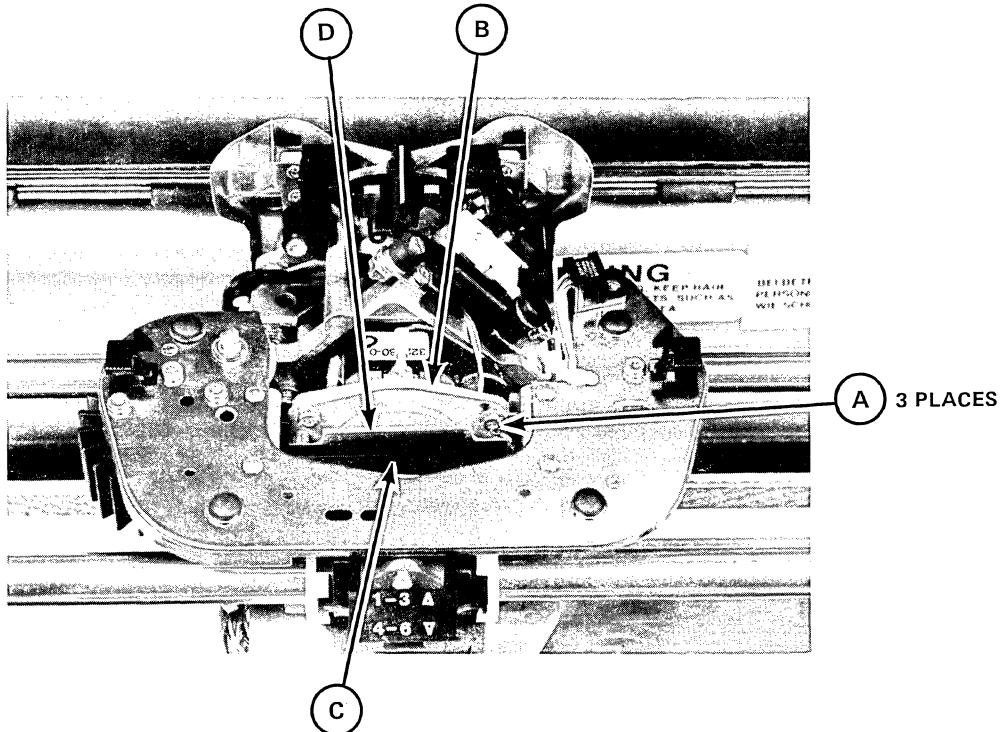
ADJUSTING THE ECS PRINT WHEEL TRANSDUCER
